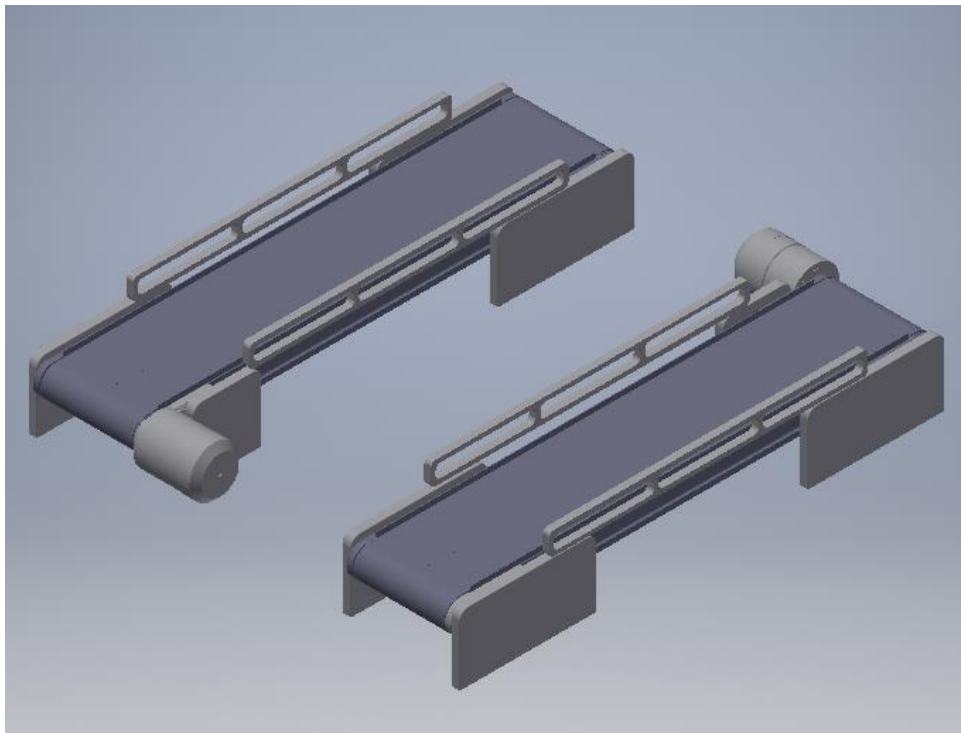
Design of the conveyor belts in AutoCad Inventor
